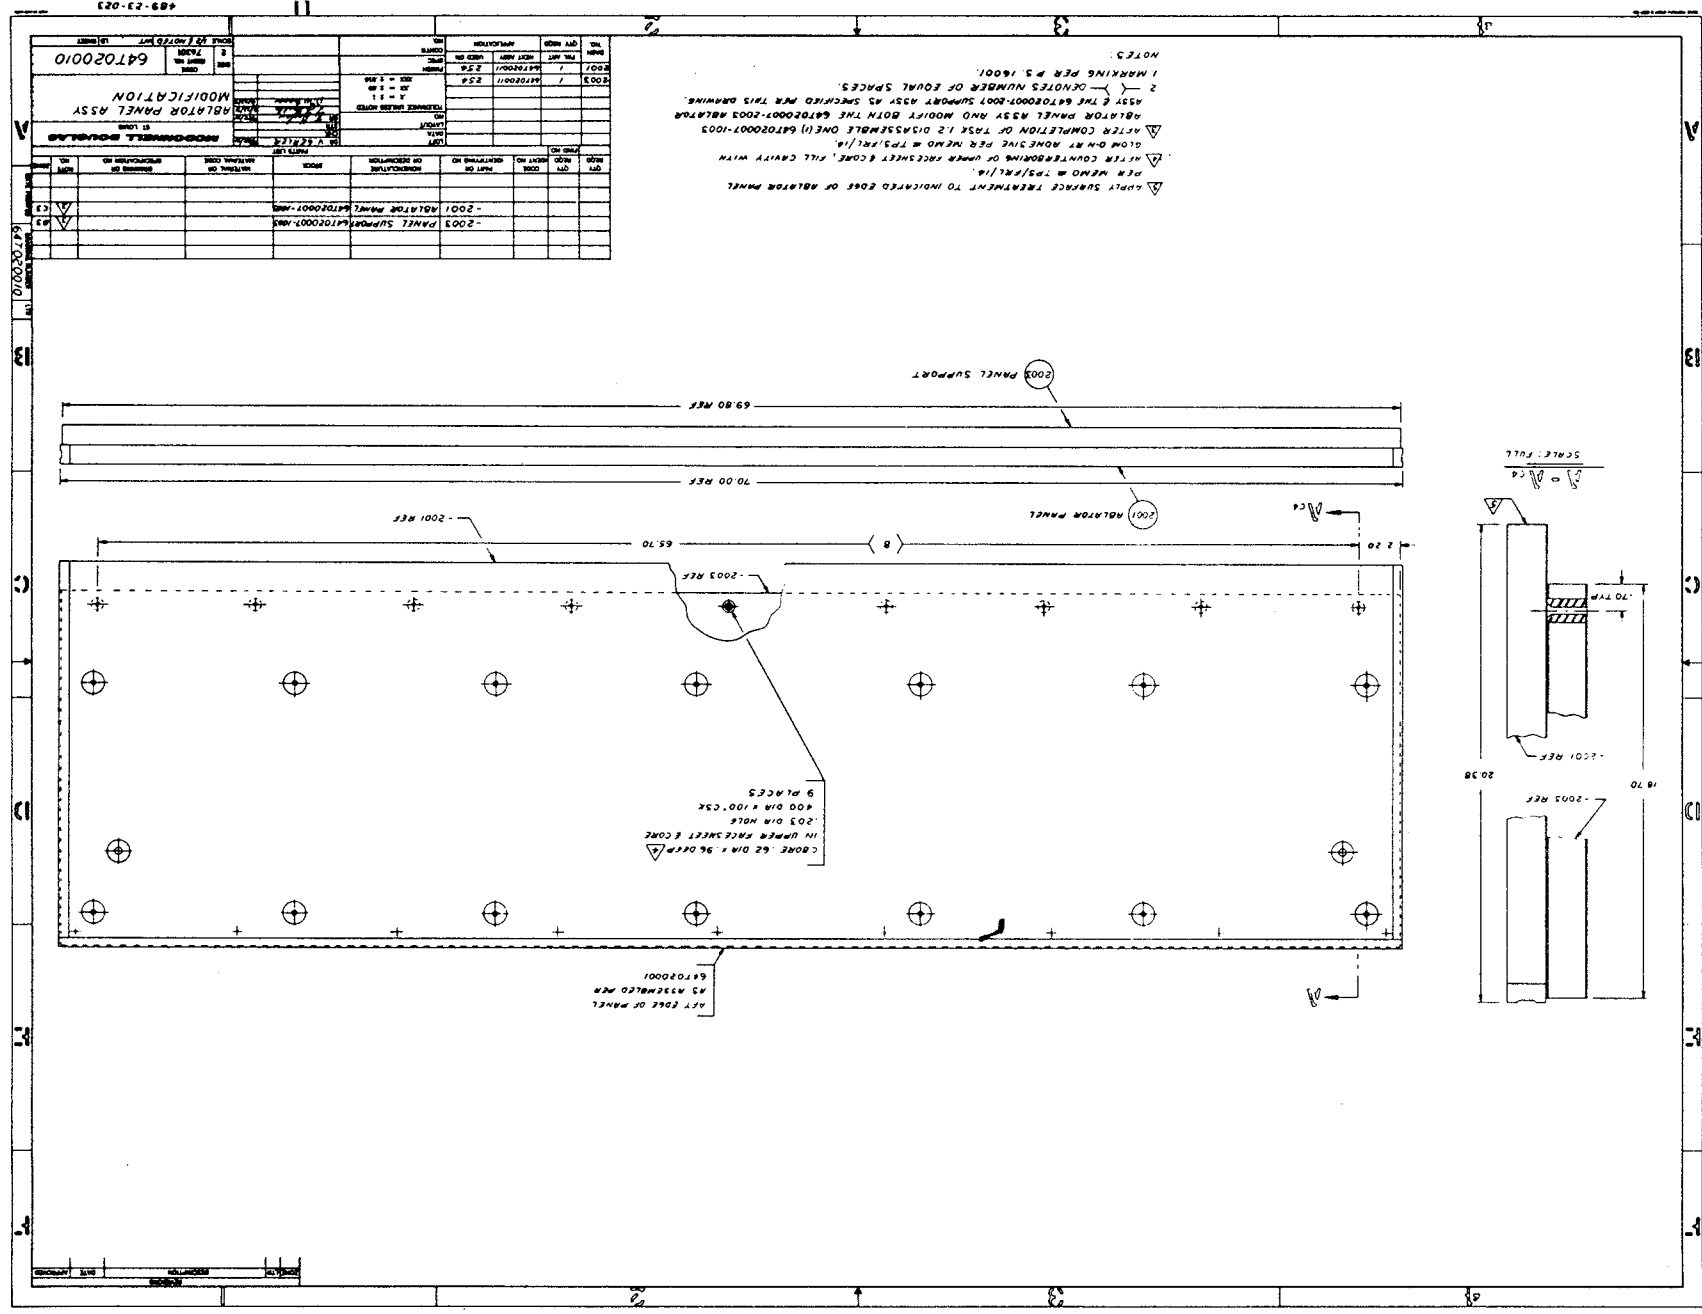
HCF REPAIR PANEL ASSEMBLY
